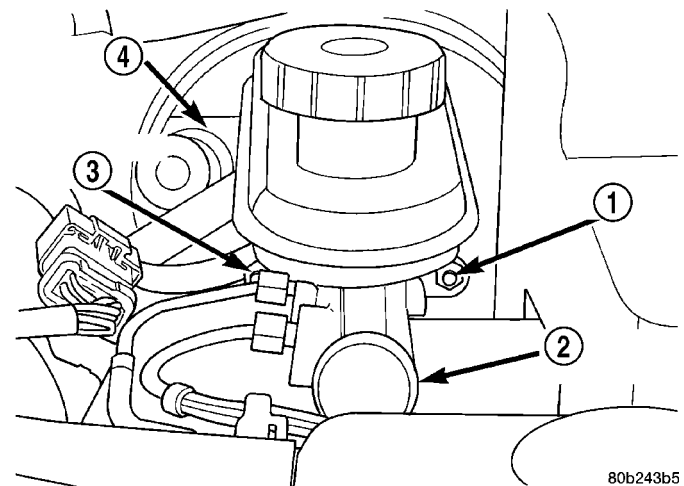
Master Cylinder To Vacuum Booster Mounting
